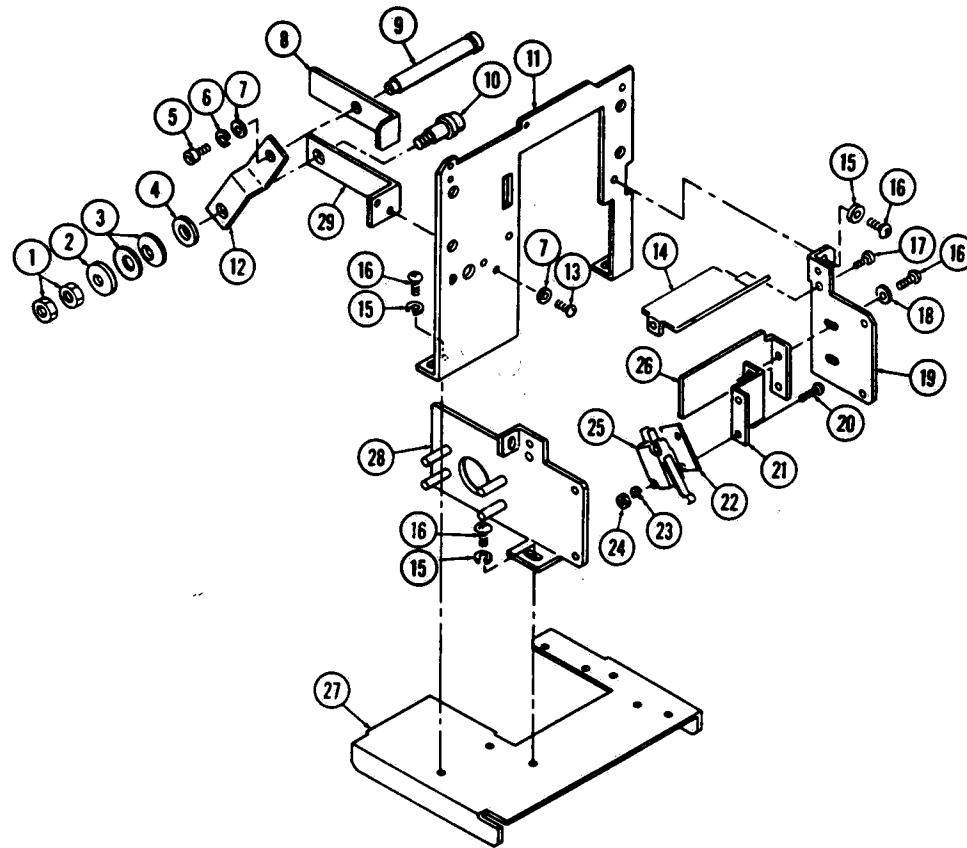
B. PRINTCON PRINTER ASSEMBLY, Units After 6/85
